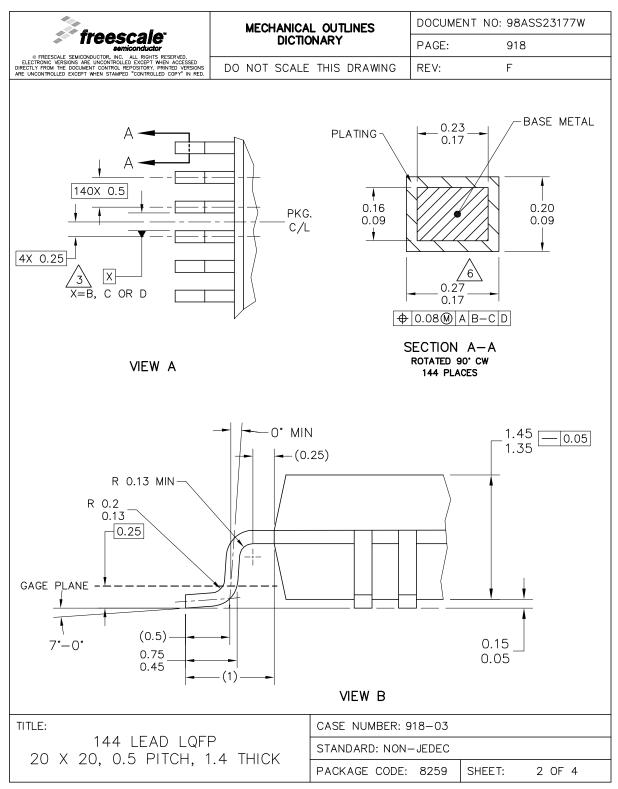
144 LQFP Package Mechanical Drawing (part 2)
